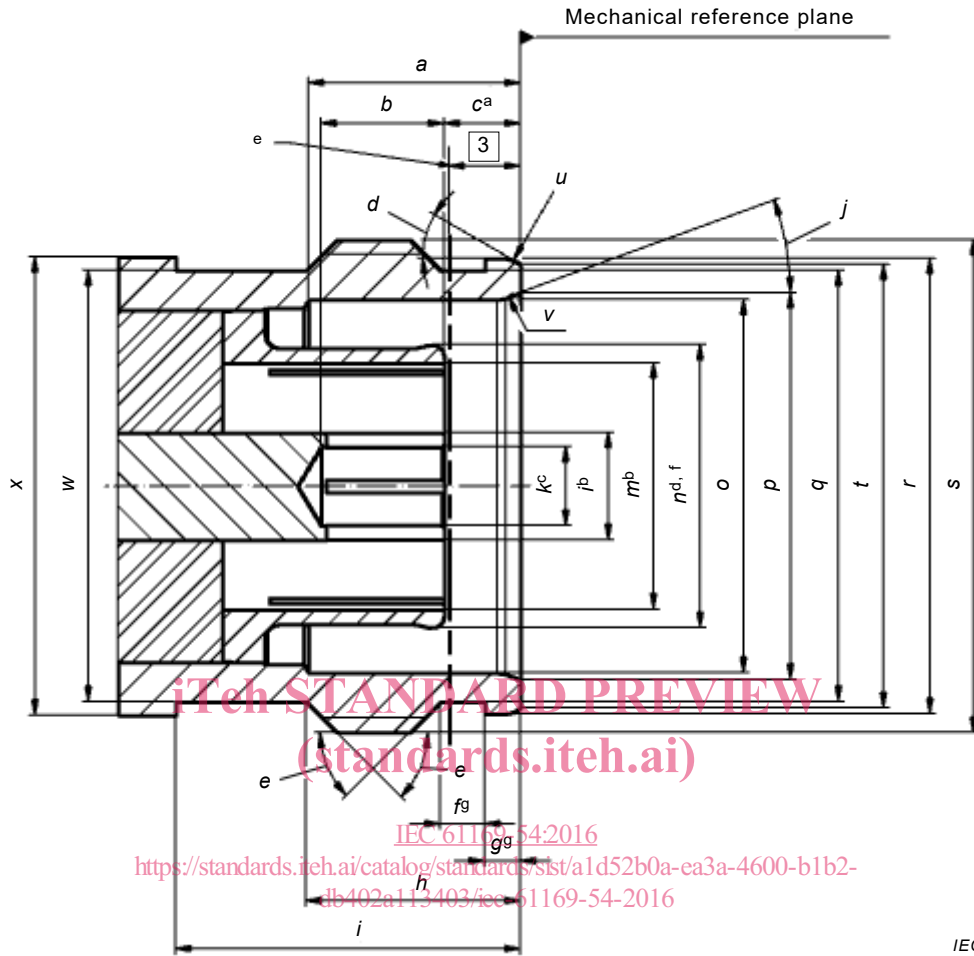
Connector with socket-centre contact (for dimensions and key, see Table 2)
